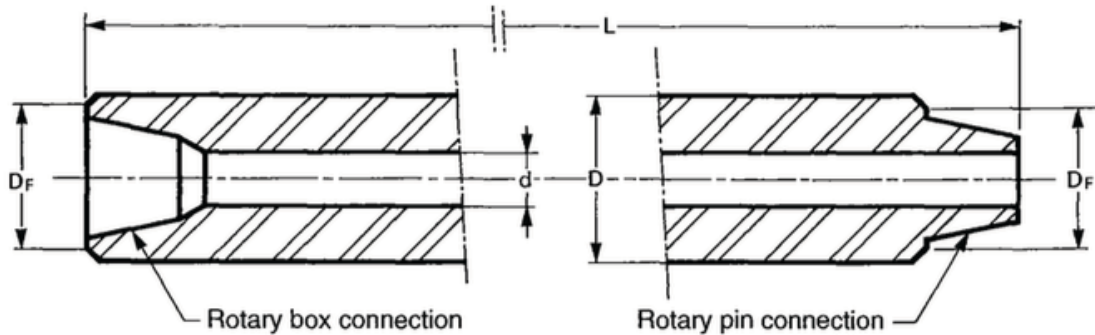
Drill Collar Side – Cut (Gabolde & Nguyen, 2006)
